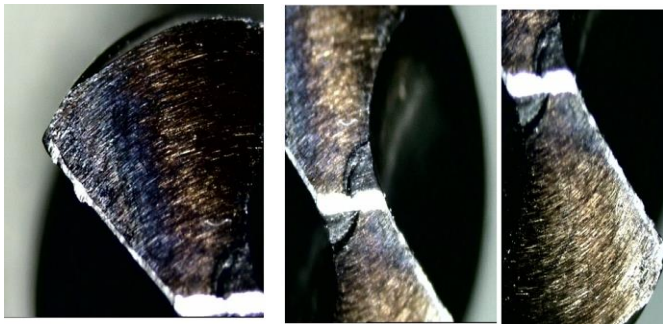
Tool image of used tool taken from CMM after 40<sup>th</sup> hole for reading A
